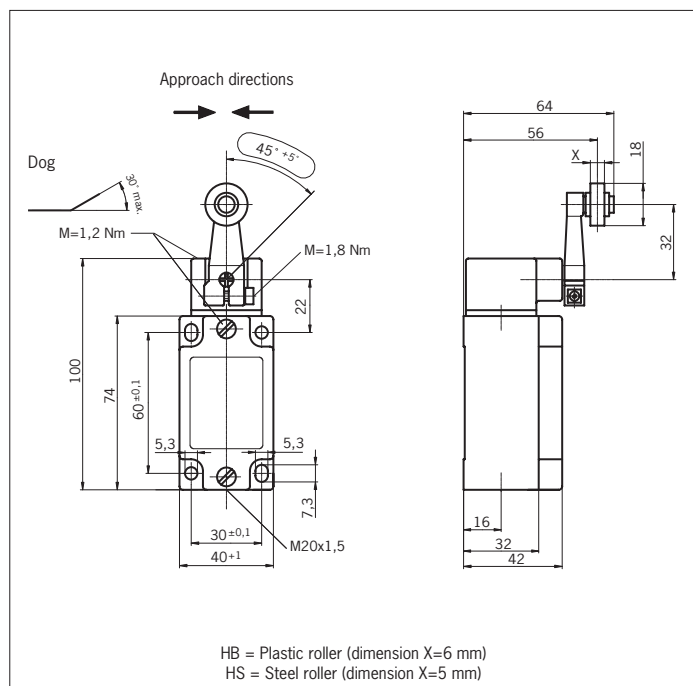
Dimension drawing for NZ1H.. with cable entry
